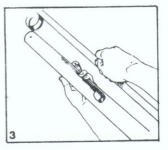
Separate the two parts of the compressor tube from the connection part 267). You can now take off the screw holding the front tube 326b), only to check any damage to the sealing gasket.
